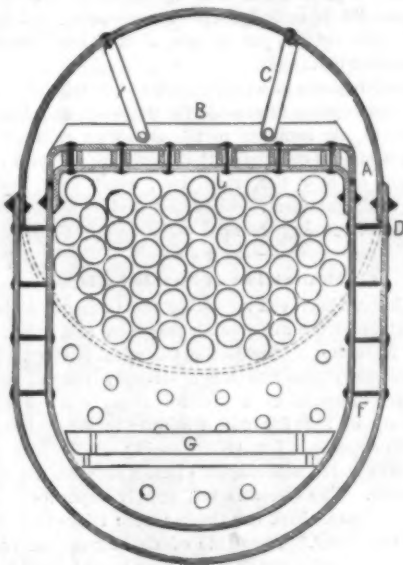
Section of Boiler through Firebox, showing Stays to the Crown Sheet.
